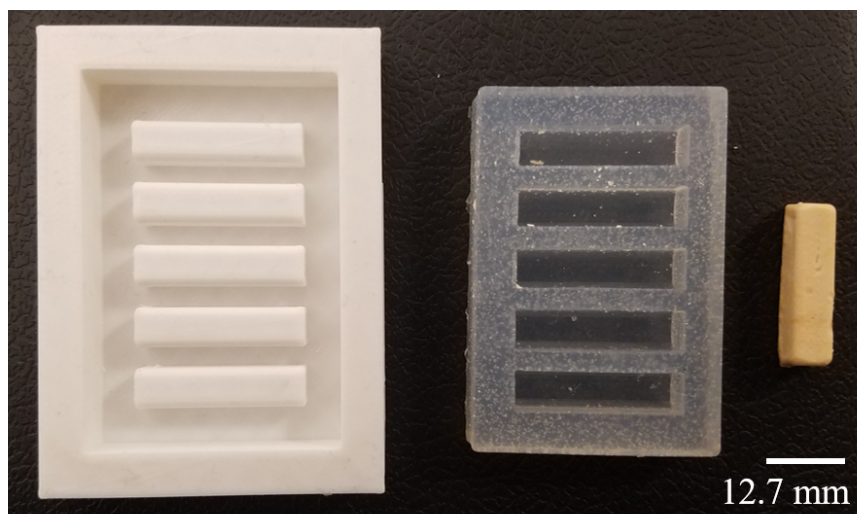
3D-printed positive rod-shaped mold, negative silicone mold, and finished neutrally buoyant rod-shaped particle (from left to right).
